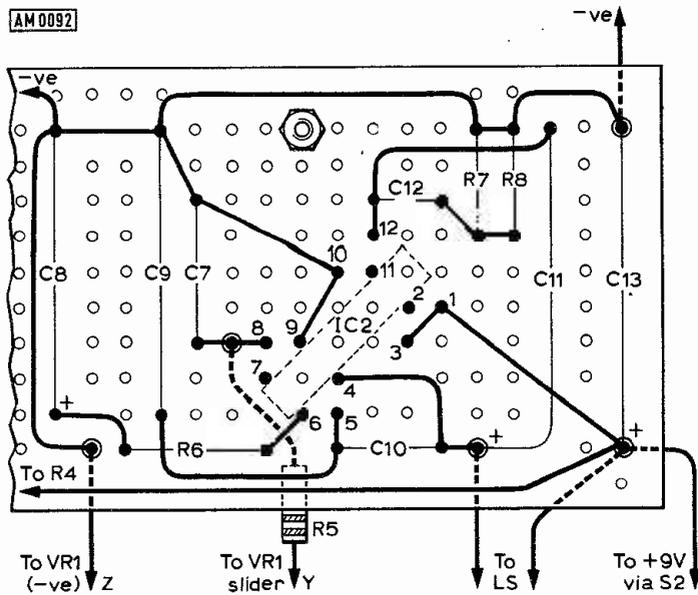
Underside view of the Veroboard showing the additional wiring.
